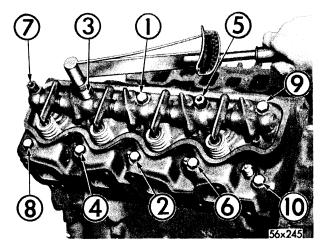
Tightening Cylinder Head Bolts (SpitFire)
